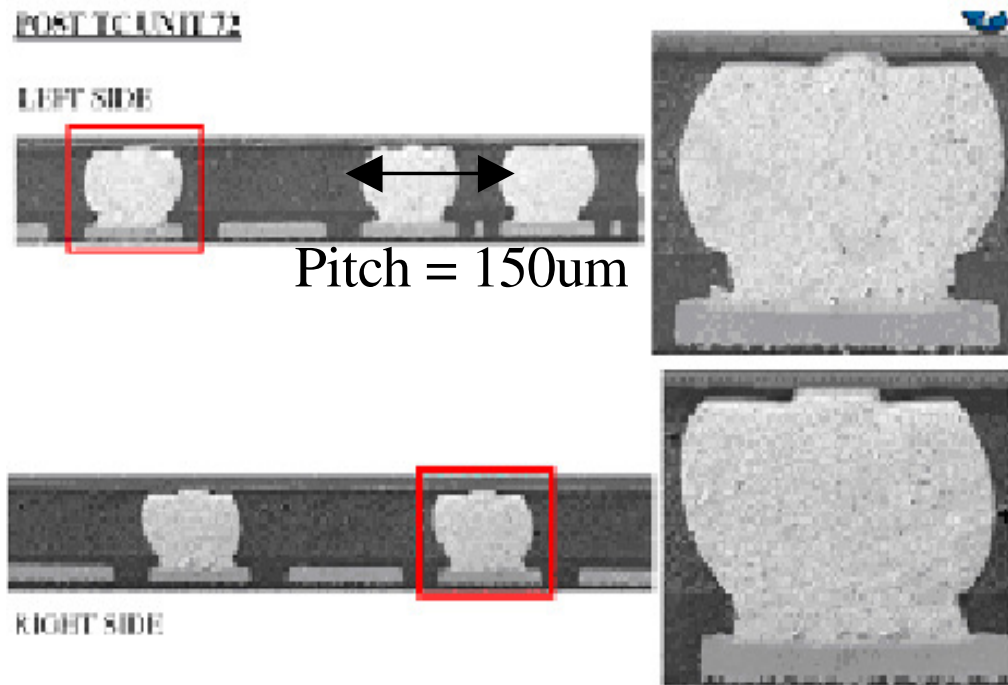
Photographs of solder bumps at the left and right sides of the 15 mm x 15 mm die after 1000 TC testing.
